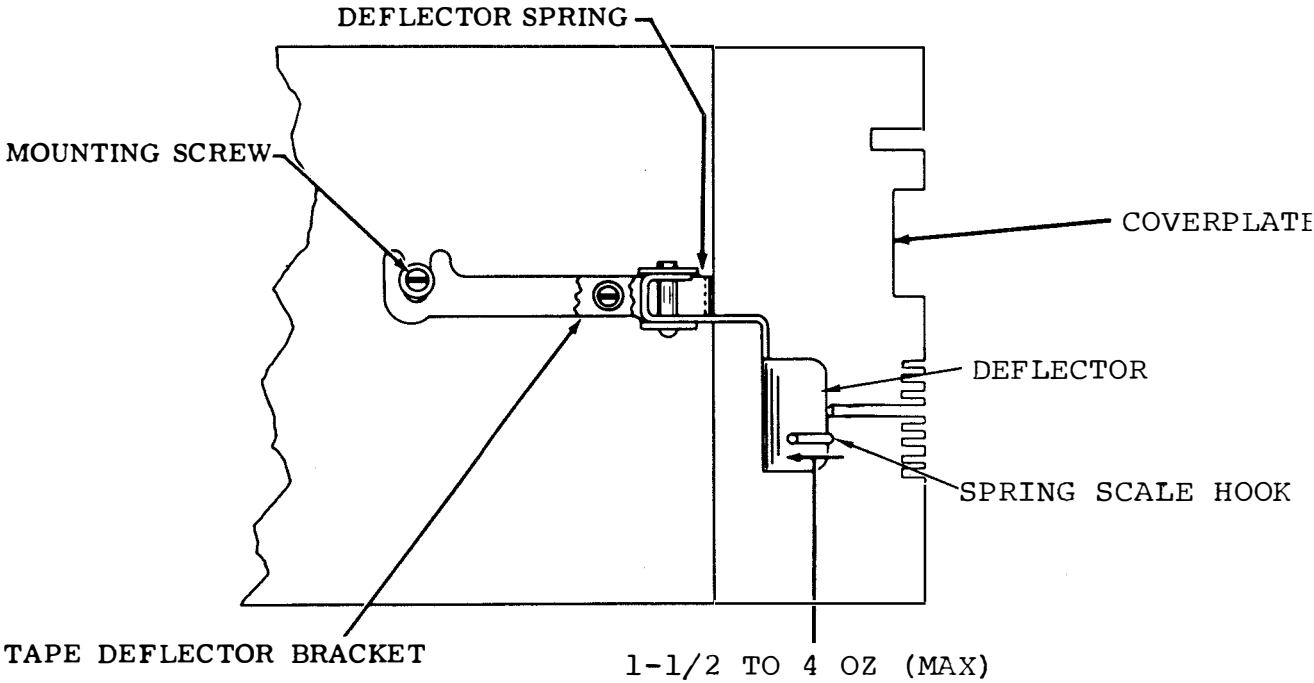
Tape Deflector Bracket and Spring, Top View
